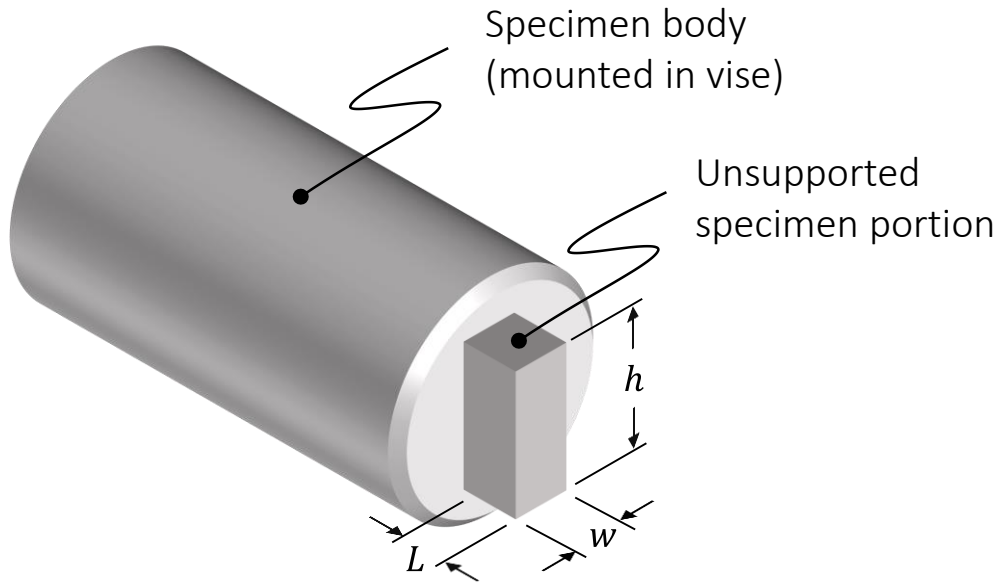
Modeled geometry for specimen deflection analysis – it is modeled that the cylindrical shank of the specimen is firmly held in the vise, and a portion of the specimen is machined to a controlled geometry to be cut during testing. The machine portion of the specimen protrudes from the vise and is unsupported, and will deflect in response to cutting loads.
